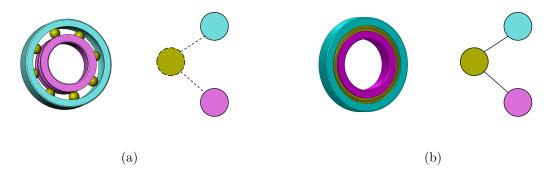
Abstract bearing definition (a) Bearing with ball pattern; (b) bearing with idealized pattern
